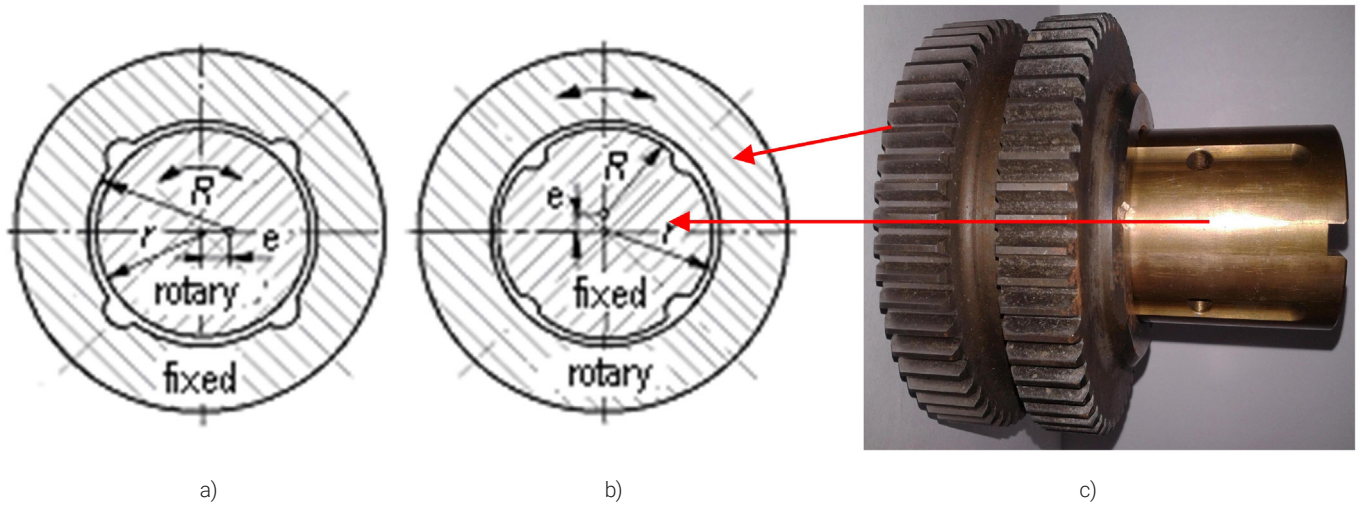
4-lobe journal bearings; a) rotating journal and fixed sleeve, b) fixed journal (4-lobe) and rotating sleeve, c) design of fixed journal and rotating sleeve; e – eccentricity [3]
